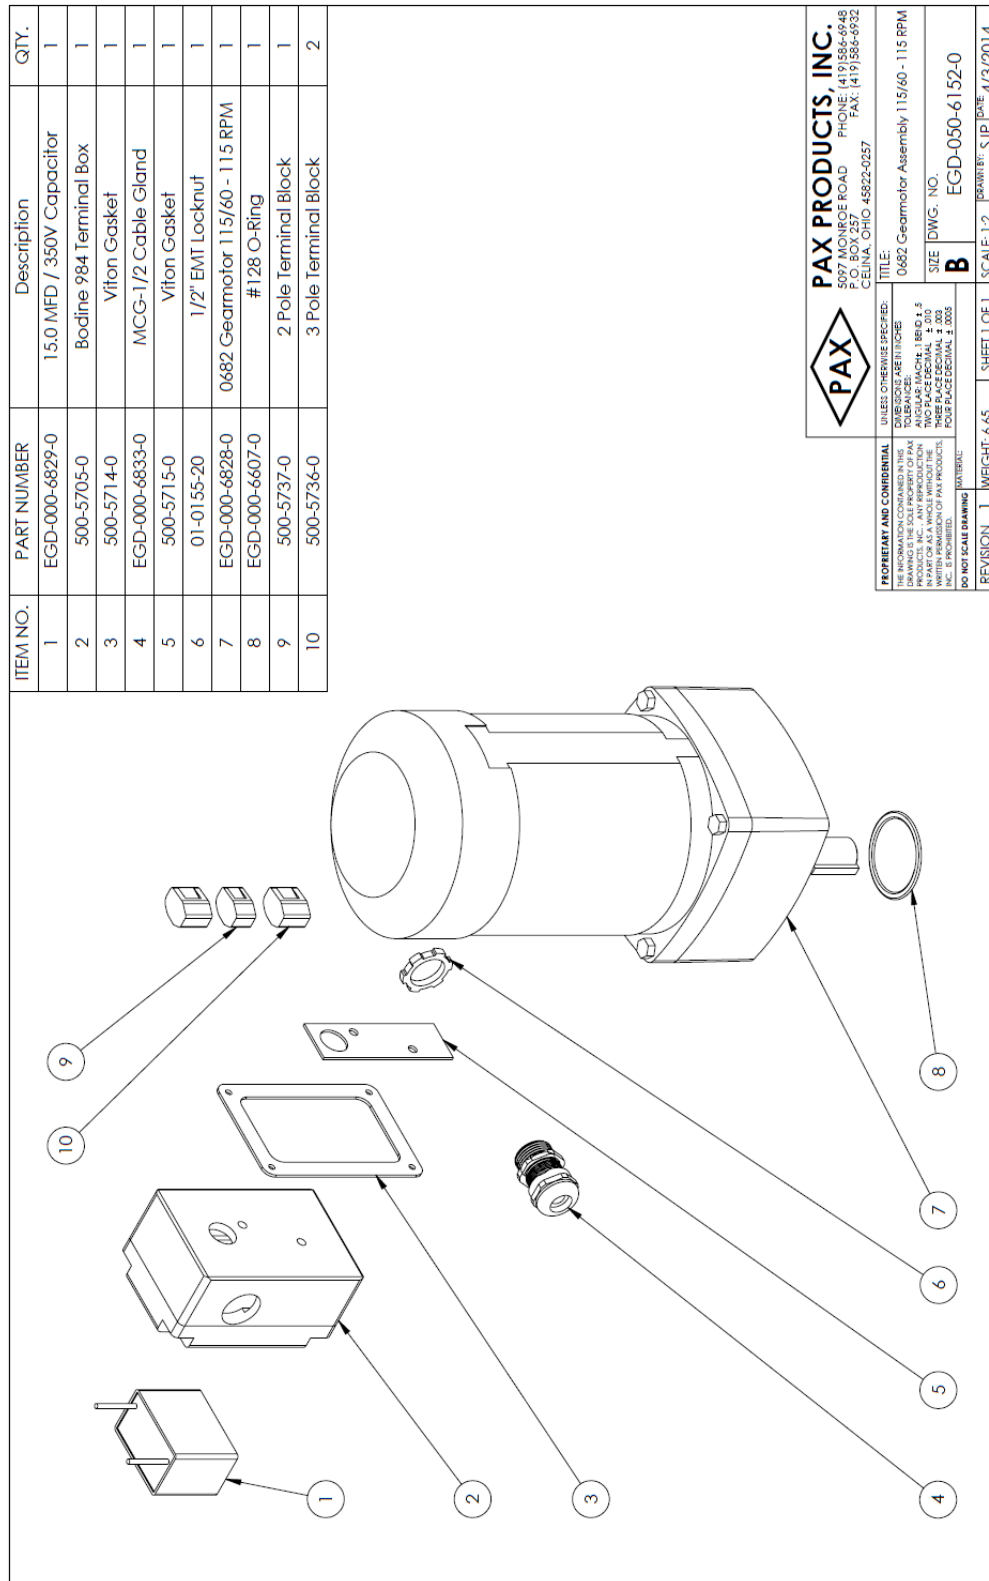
EGD-050 GEARMOTOR ASSEMBLY
